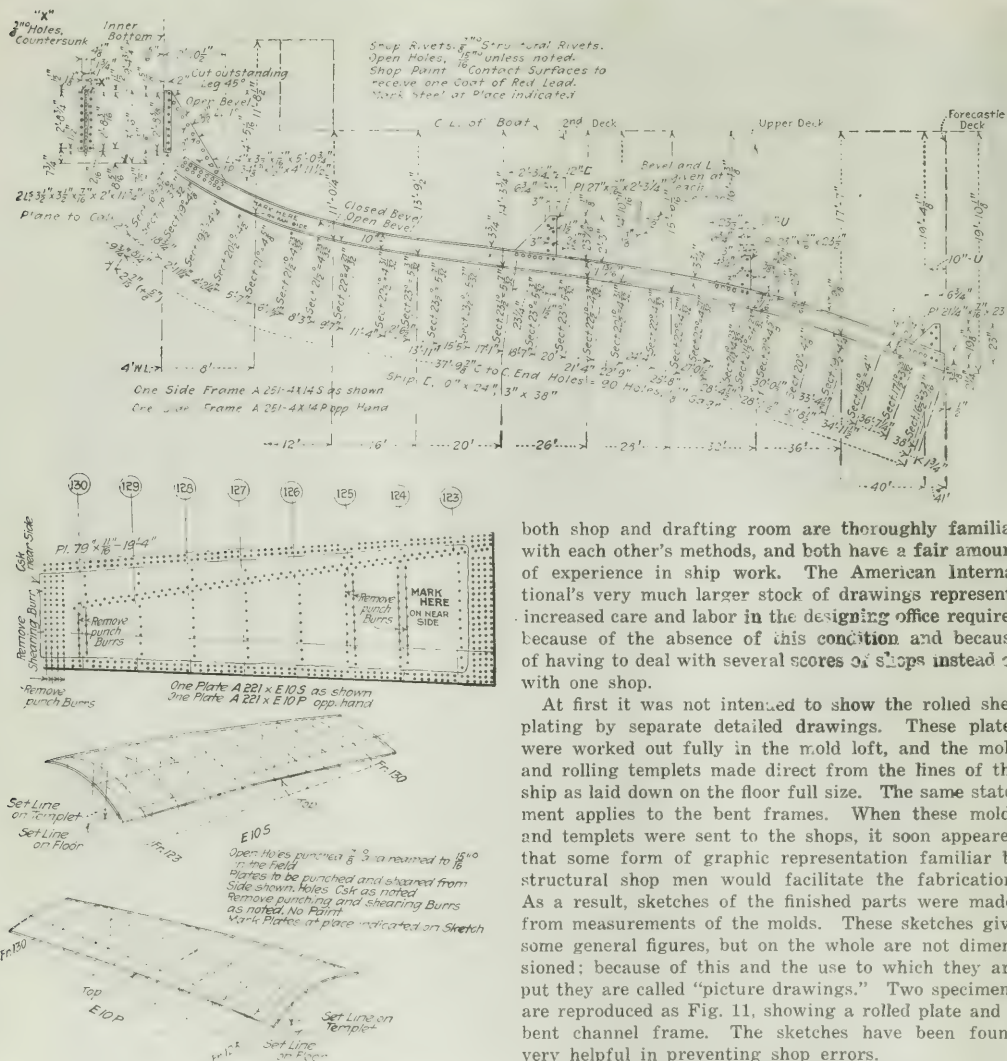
PICTURE DRAWINGS OF MOLDED PLATE AND OF BENT CHANNEL FRAME
